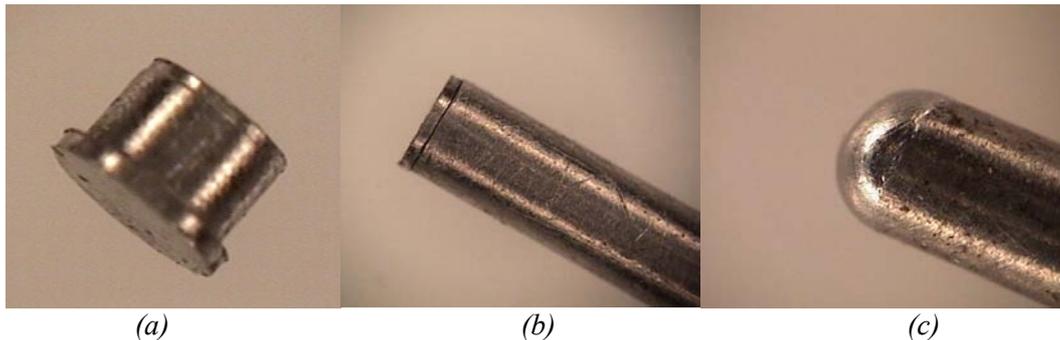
Photographs of cap and tube; (a) titanium cap, (b) assembly of capsule before welding, (c) dummy capsule
